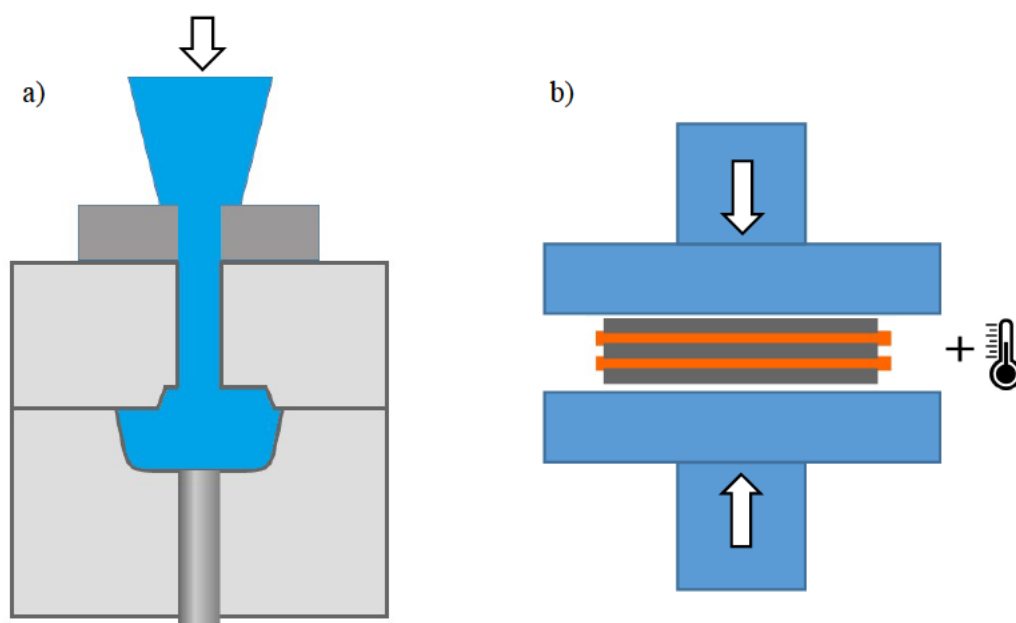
Manufacturing process scheme of a) Injection Moulding and b) Compression Moulding.
